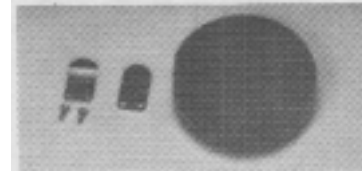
Reed plate and carburetor mount assembly showing reed plate, reed backup and mounting screws.
